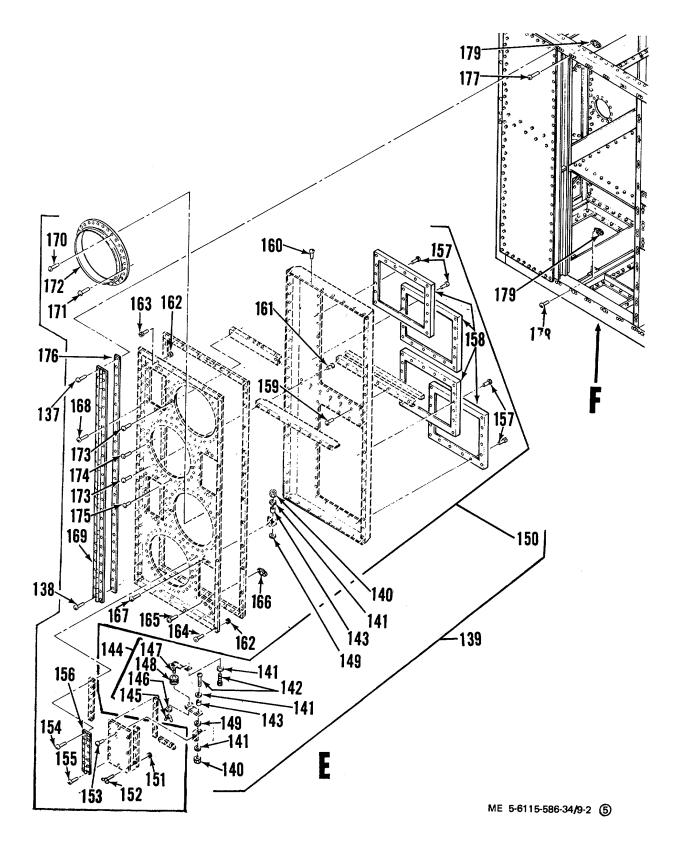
Shell assembly, exploded view. (sheet 5 of 9)
